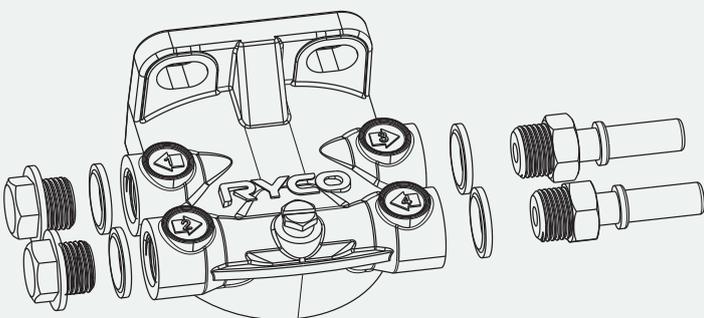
FUEL WATER SEPARATOR HEAD PREPARATION
